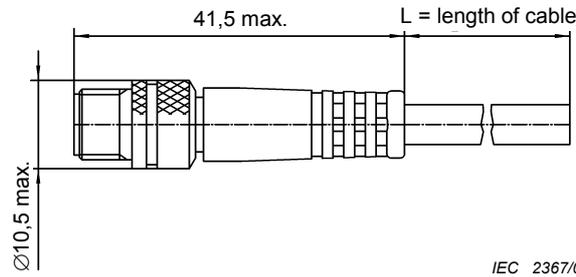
Non-rewireable connector, straight version, with locking nut, male contacts
